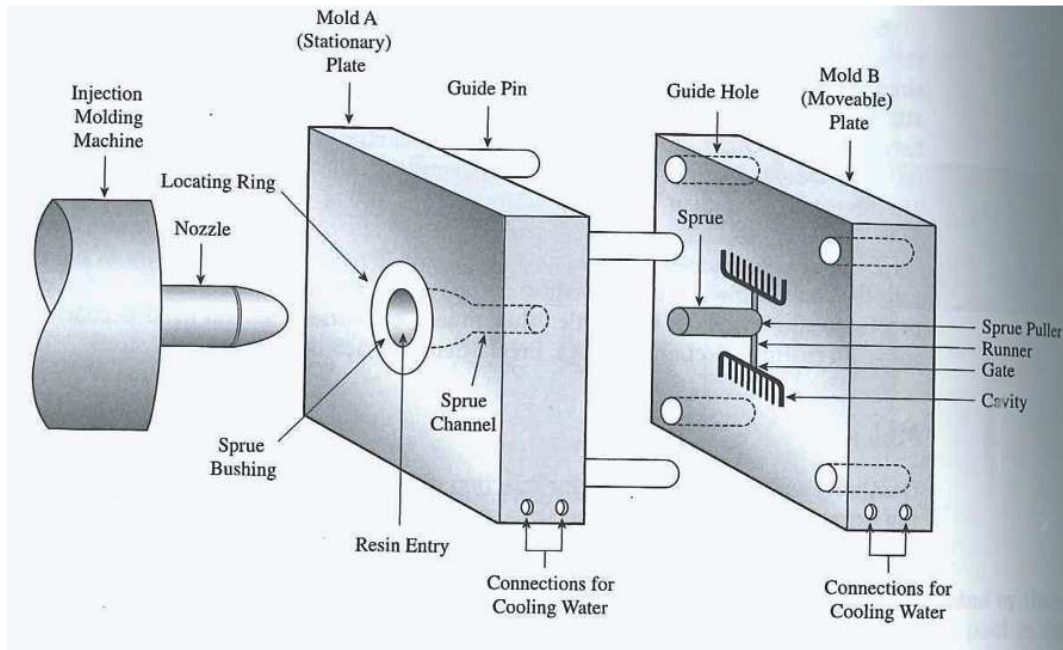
The main parts of the mould in the injection moulding machine (Strong 2006)
